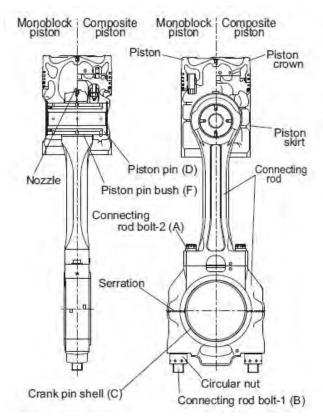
Piston and connecting rod parts (Daihatsu DK)
